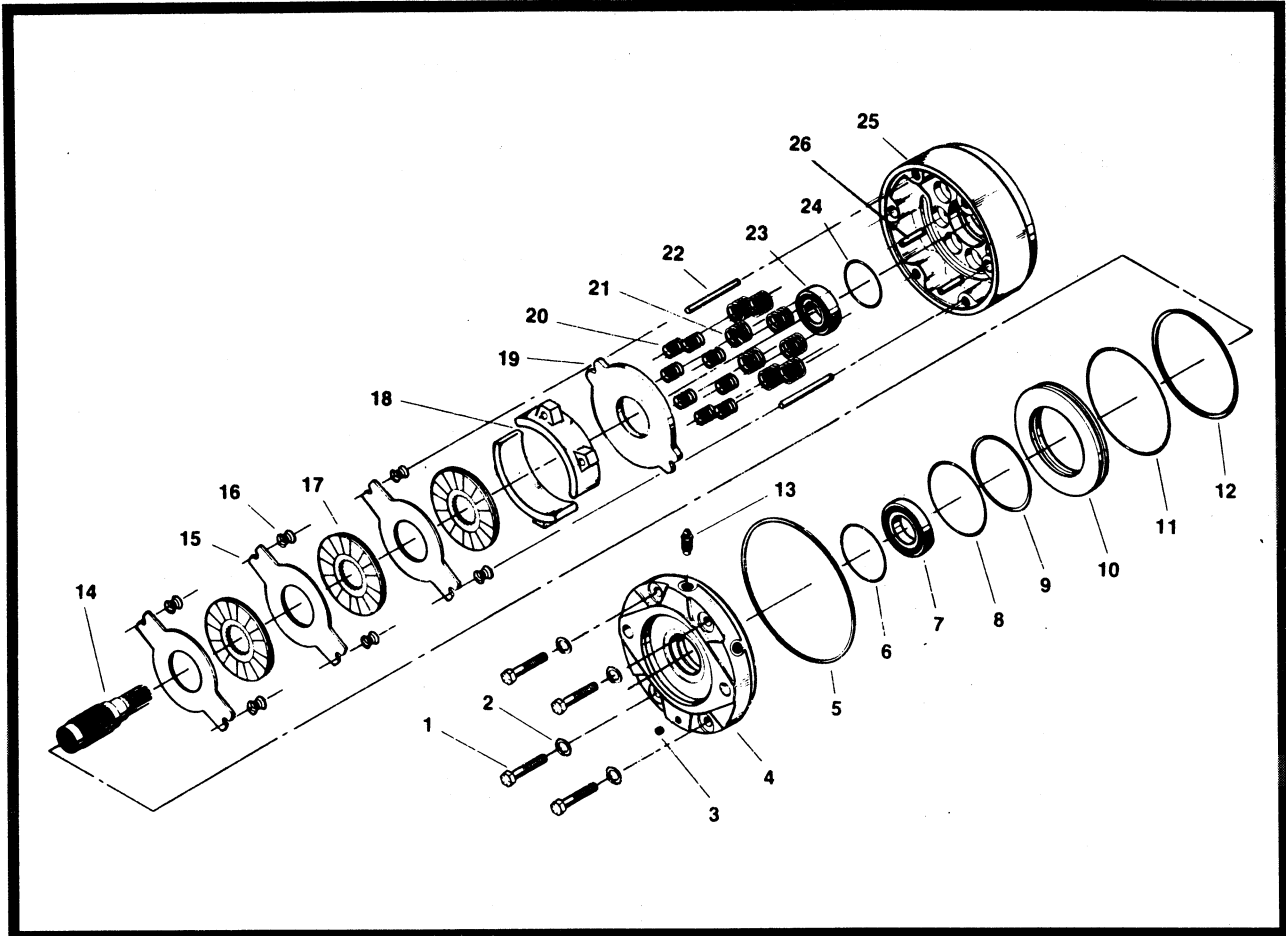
Drive Brake Assembly - Mico (Machines Built Prior To May 1992).
